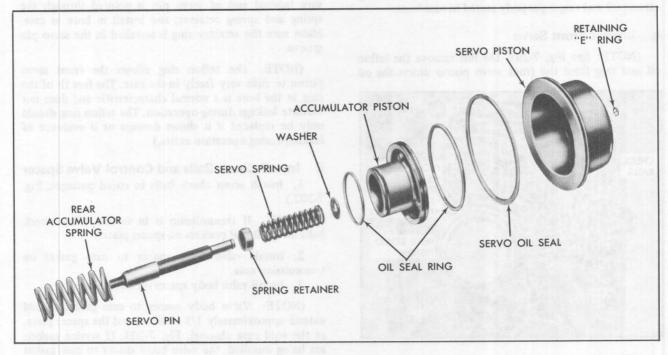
Rear Servo and Accumulator—Exploded View
